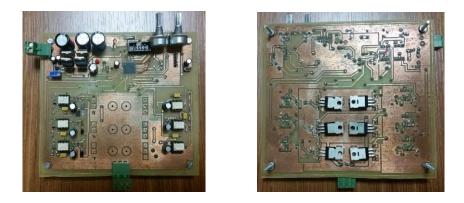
Designed Three-Phase Asynchronous Motor Driver Card
